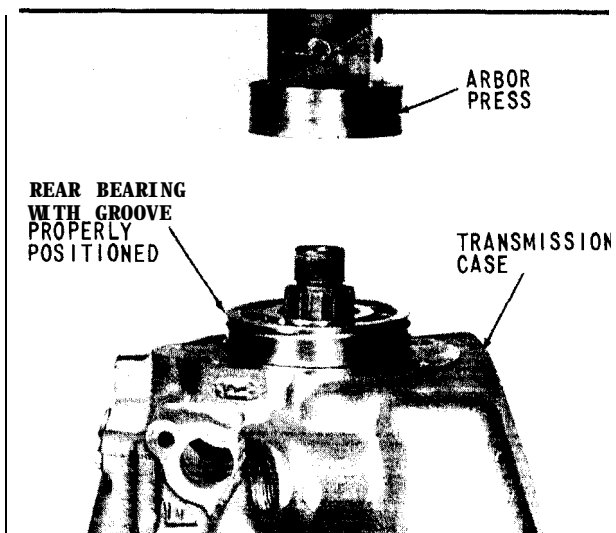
Rear Bearing Properly Positioned on Transmission Case
